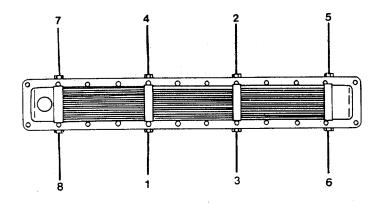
Housing to Core Capscrew Torque Sequence.
